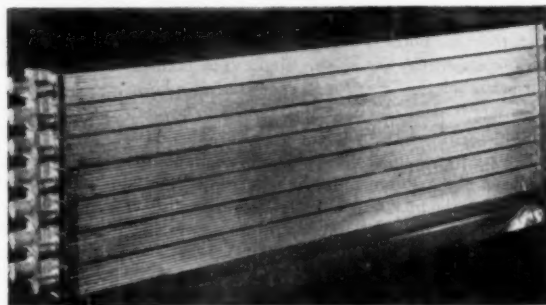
IMPROVED DESIGN OF SLAB HEAT EXCHANGERS
